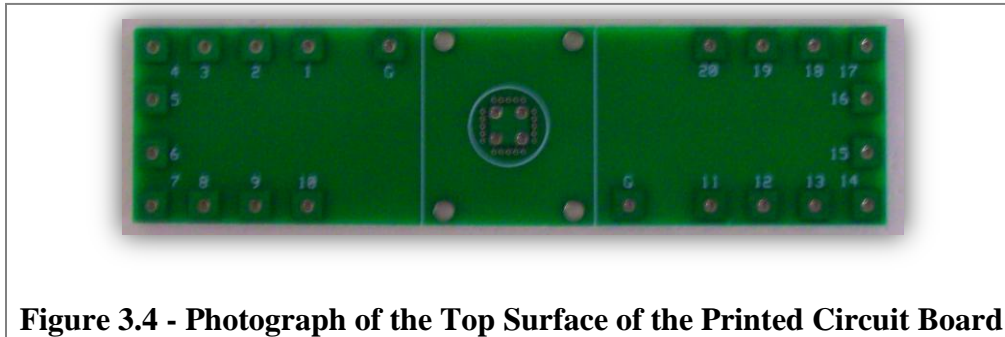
Photograph of the Top Surface of the Printed Circuit Board
